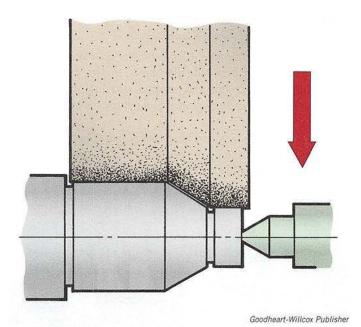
In plunge grinding, the grinding wheel is fed into the rotating work. Because the work is no wider than the grinding wheel, reciprocating motion is not needed.
